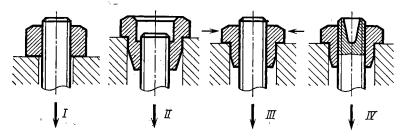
Nuts I—compression type; II—tension type; III—combination (tension-compression) type; IV—same, with recessed end of bolt shank
